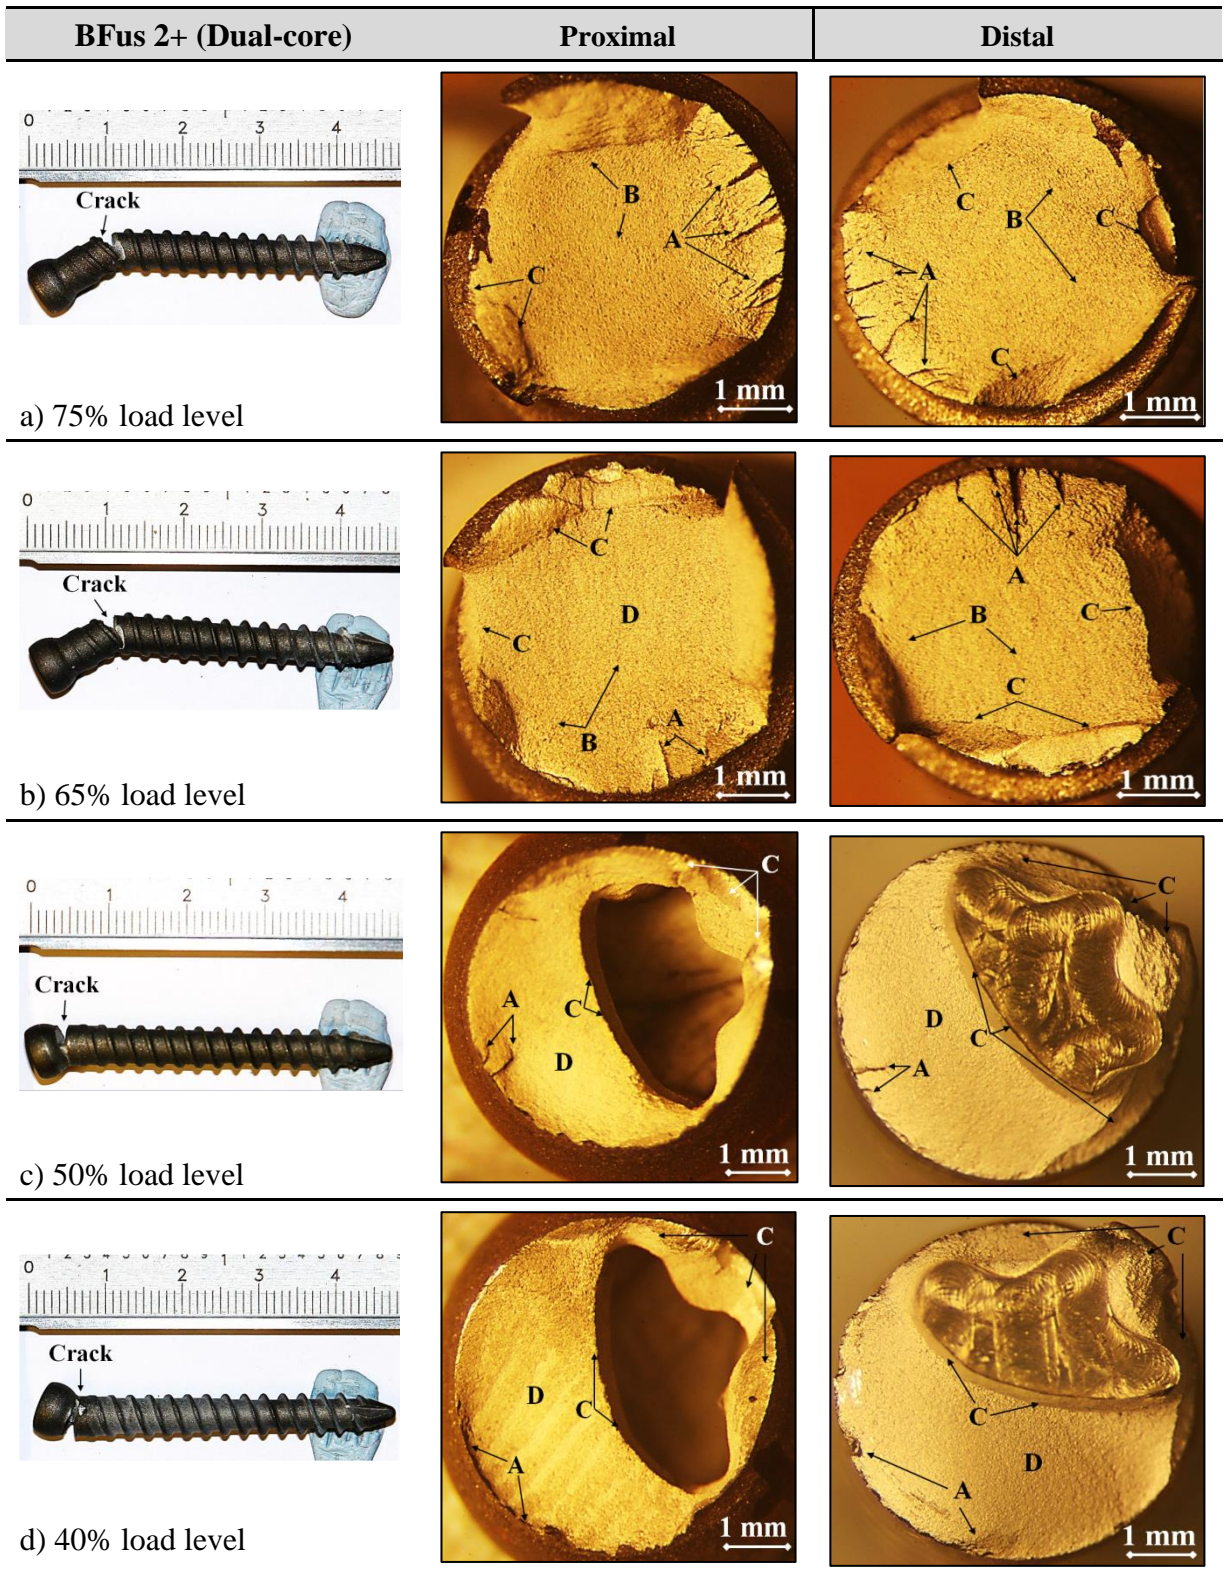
Stereo microscope images of BFus 2 screws fracture surface. The letters in the photography indicate A - Initiation of the crack; B - Fatigue crack propagation; C - Brittle failure.
